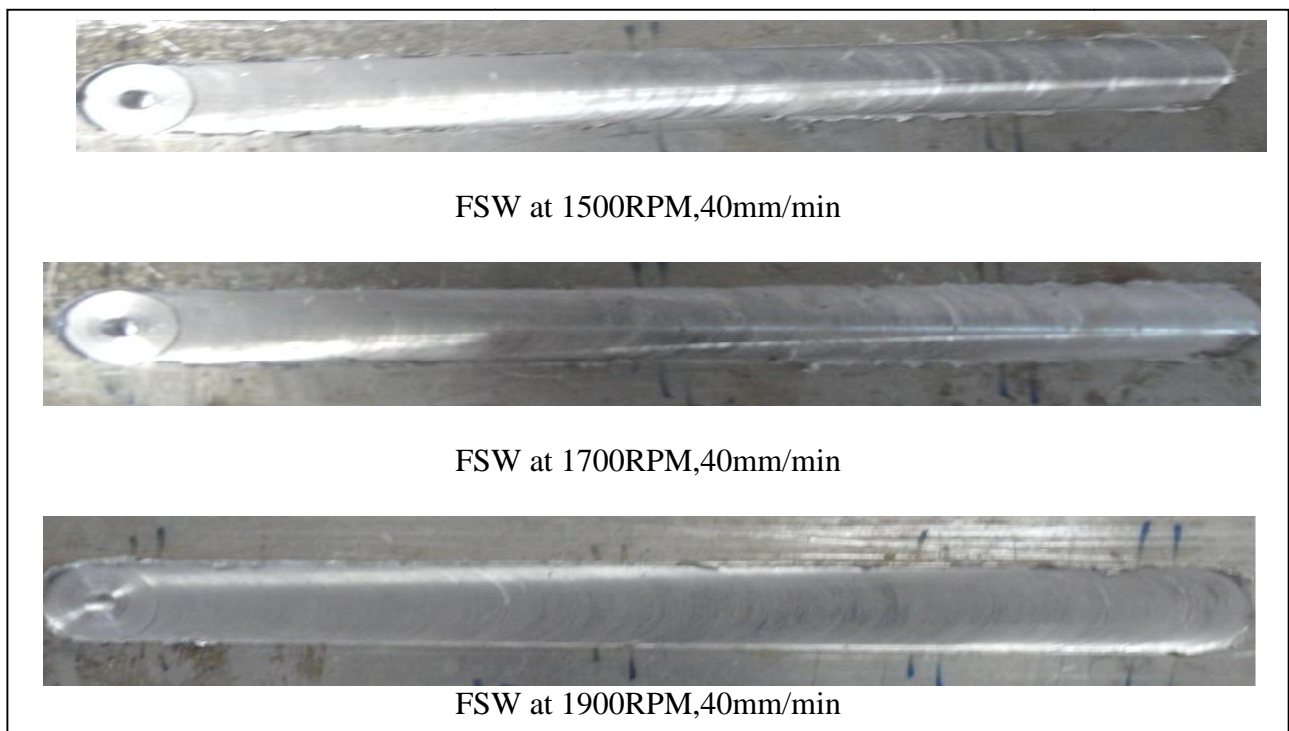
The appearance of upper surface of welding beads of 7075-T73 AA plates produced by FSW.
